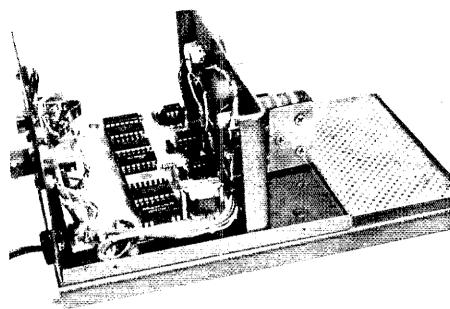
Inside view of the touch keyer. Note perf-board construction and chassis, as explained in text.
